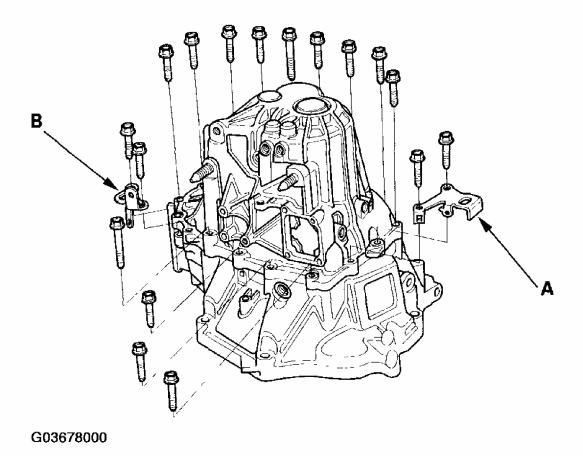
Installing Transmission Hangers And 8mm Flange Bolts Courtesy of AMERICAN HONDA MOTOR CO., INC.
